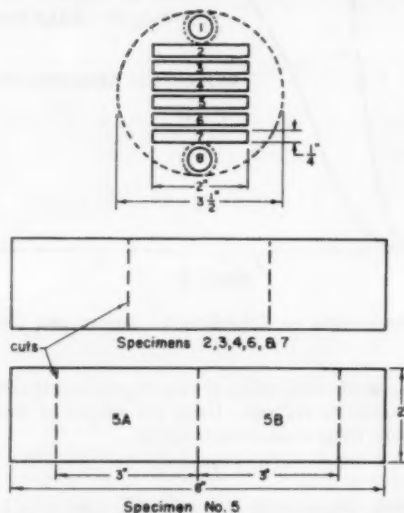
LOCATION OF PLATE SPECIMENS IN THE SAE 4340 BAR AND THE CUTS MADE TO OBTAIN THE 3-IN. SPECIMENS
